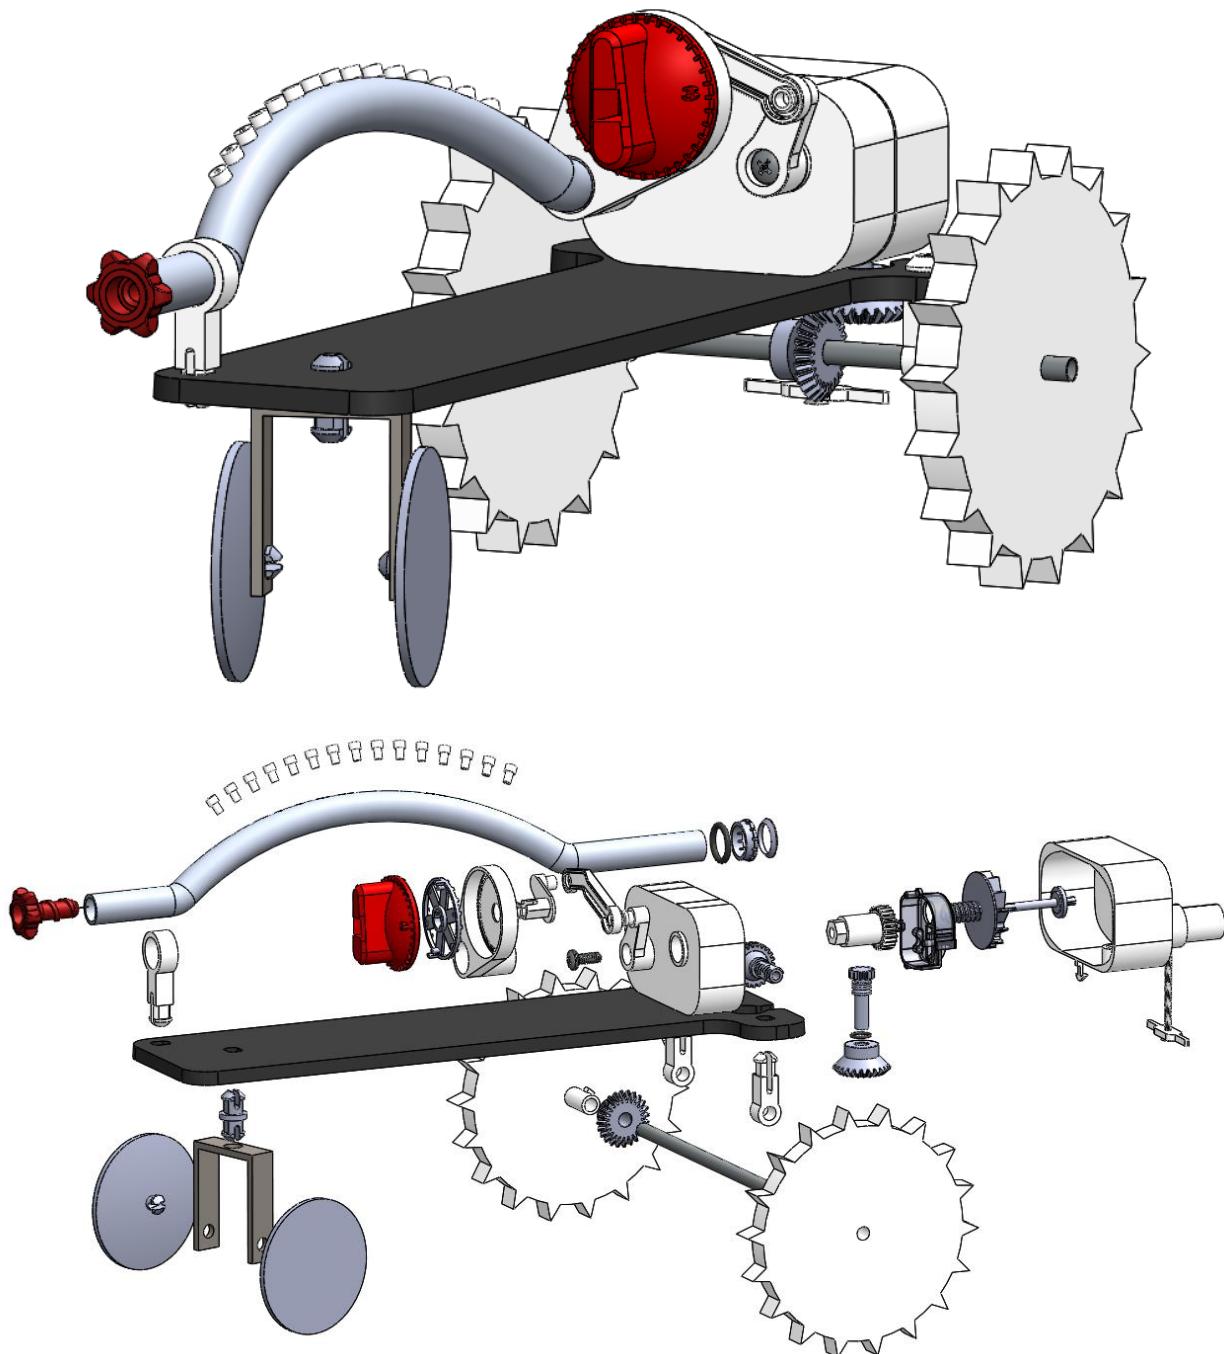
Assembly View and Exploded View of Final Mobile Sprinkler Design
